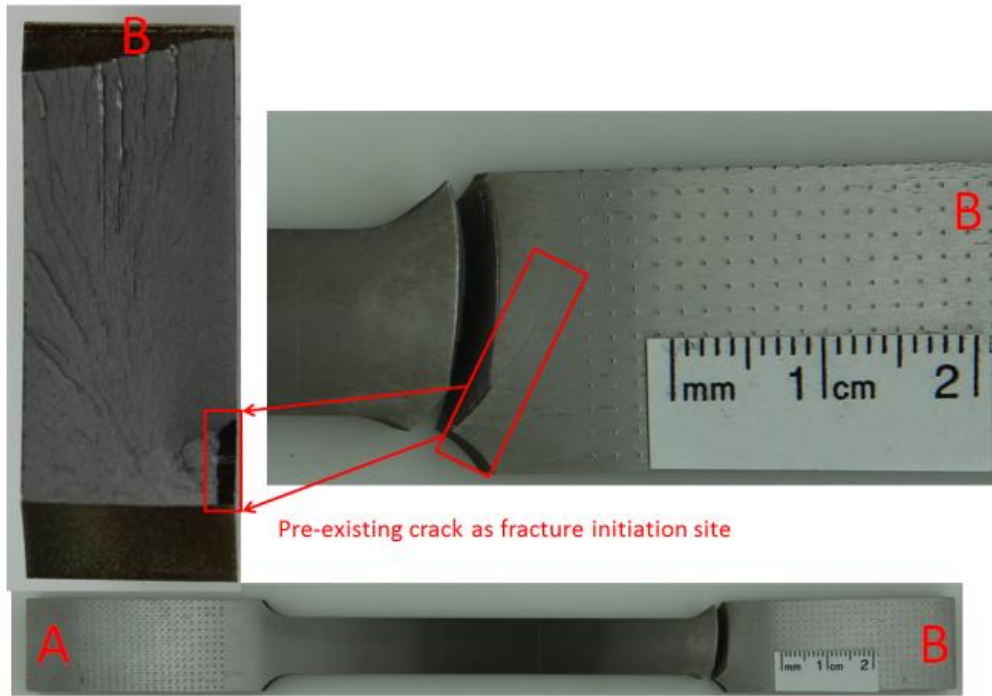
The bottom image shows the 8.5mm thick tensile bar after failure. Above right segment B of the sample is shown with the crack believed to be the failure initiation site. The top left image shows the fracture surface of segment B, again with the pre-existing crack highlighted.
